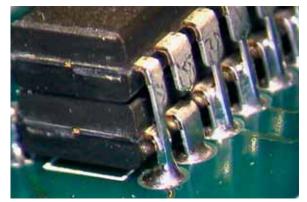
DIP component stacked and soldered onto another DIP component. One lead shown clipped. Note: Leads of added component should not be inserted into the plated holes.
